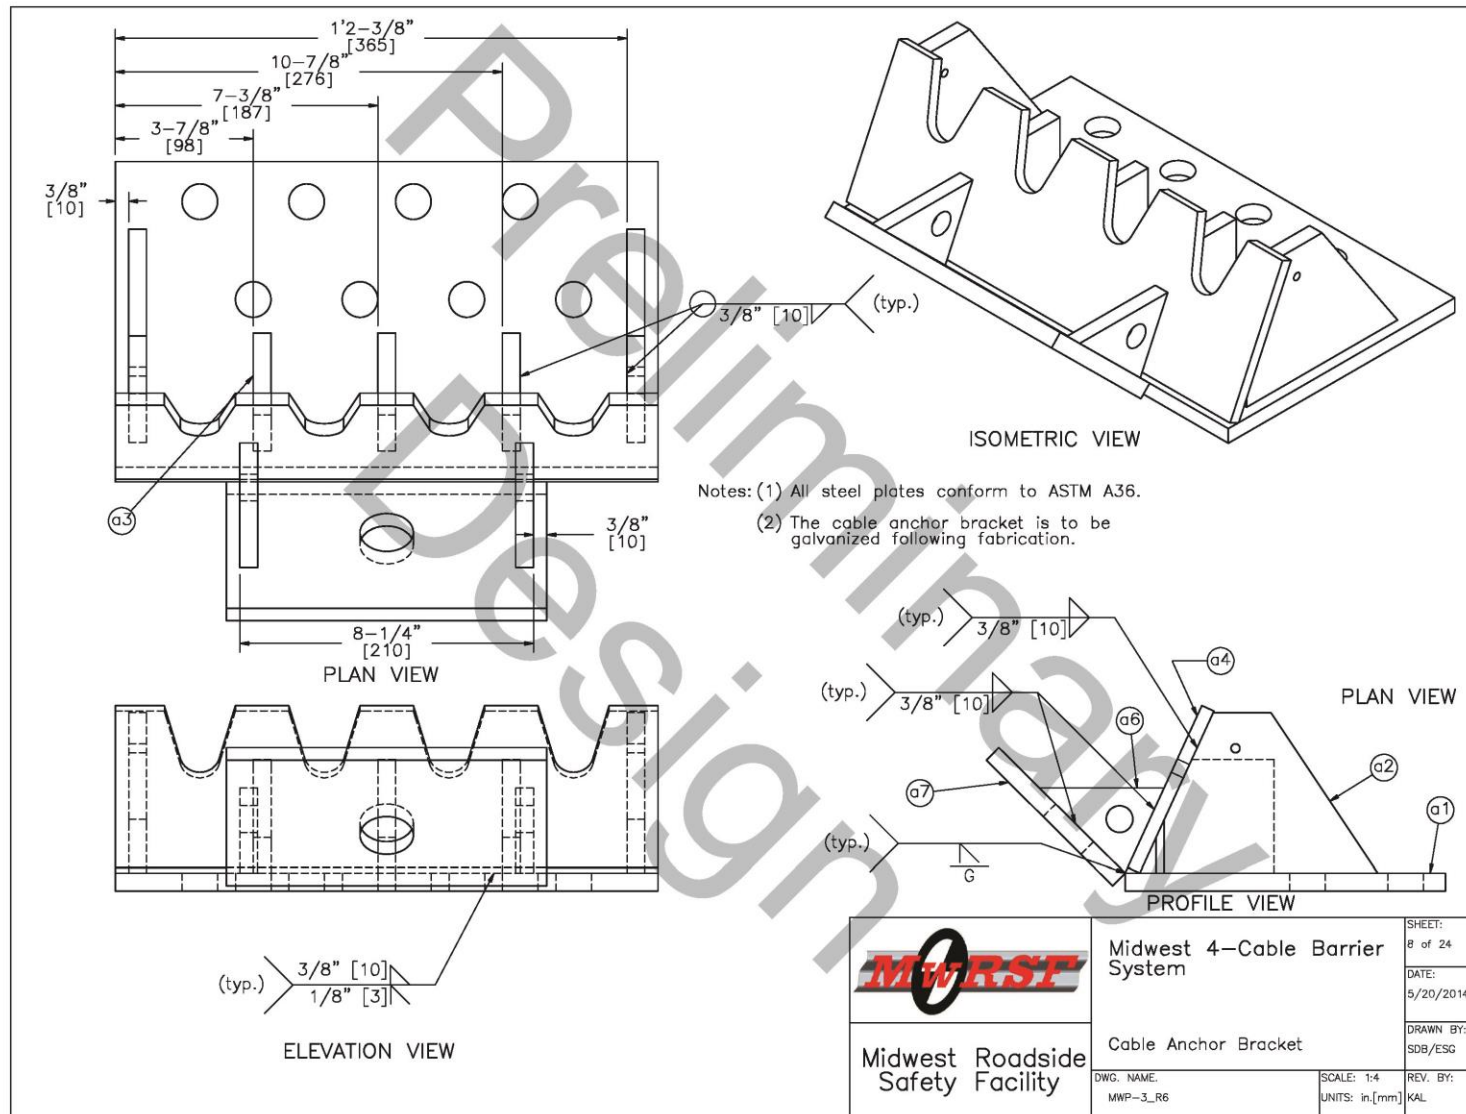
Cable Anchor Bracket, Test No. MWP-3
